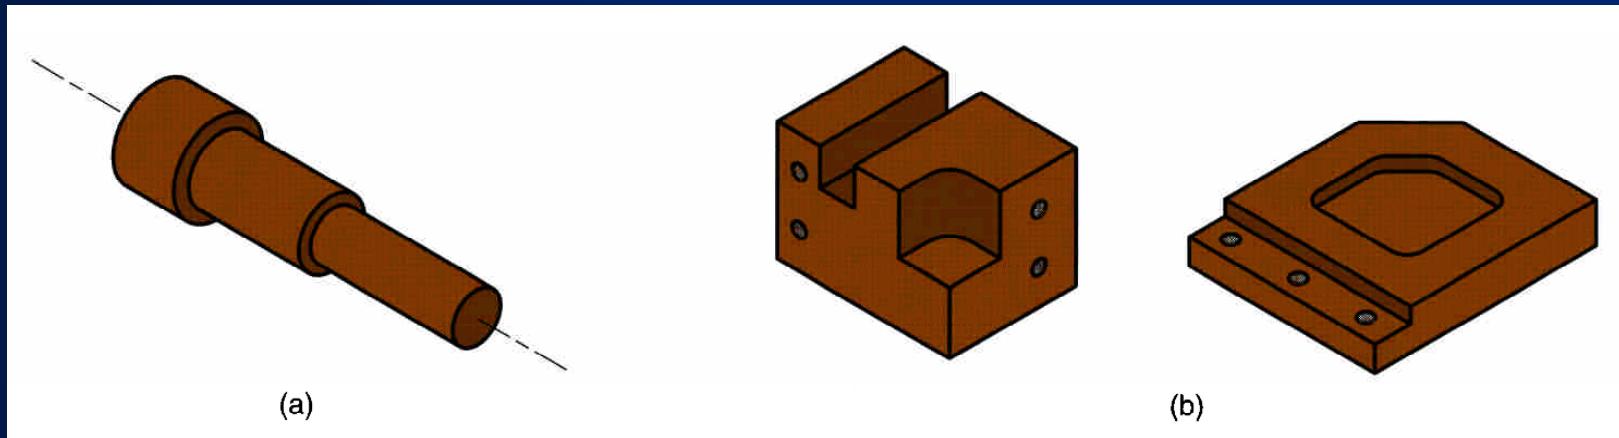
Machined parts are classified as: (a) rotational, or (b) nonrotational, shown here by block and flat parts
